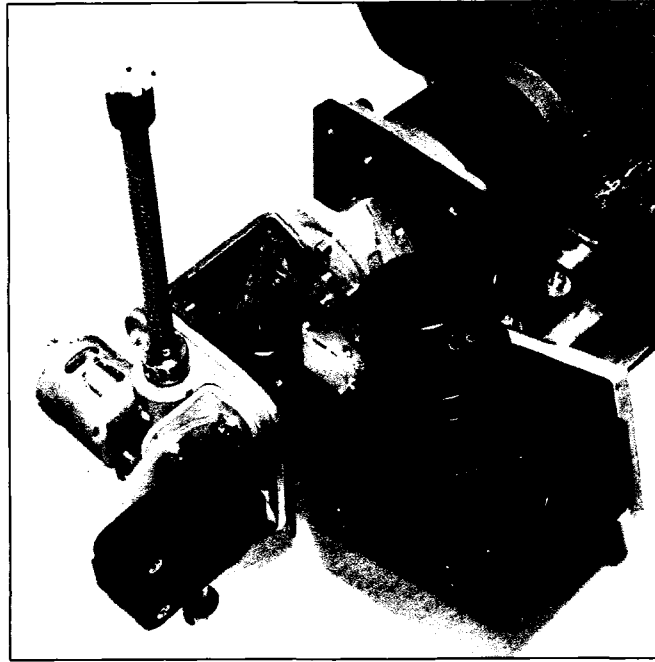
Tactile Probe Assembly Attached to the Optical Measuring System
